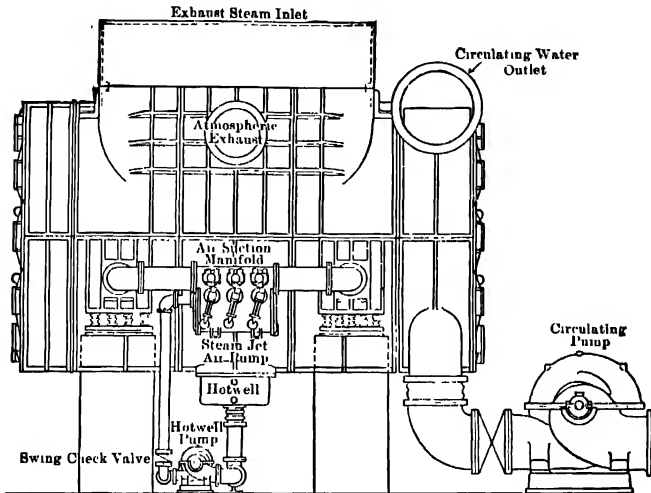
50,000 Sq. Ft. Condenser Layout with Three-element Wheeler Steam Jet Air Pump.
